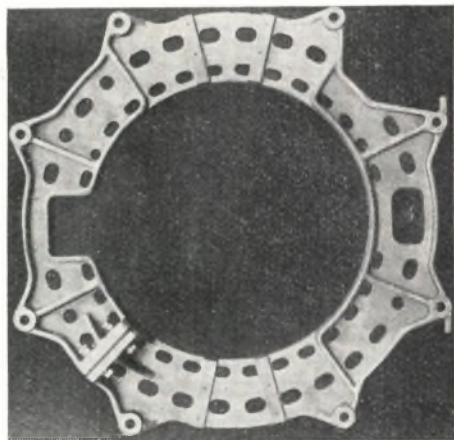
A steel coil clamping ring of the type used in the assembly shown in Fig. 3, above
